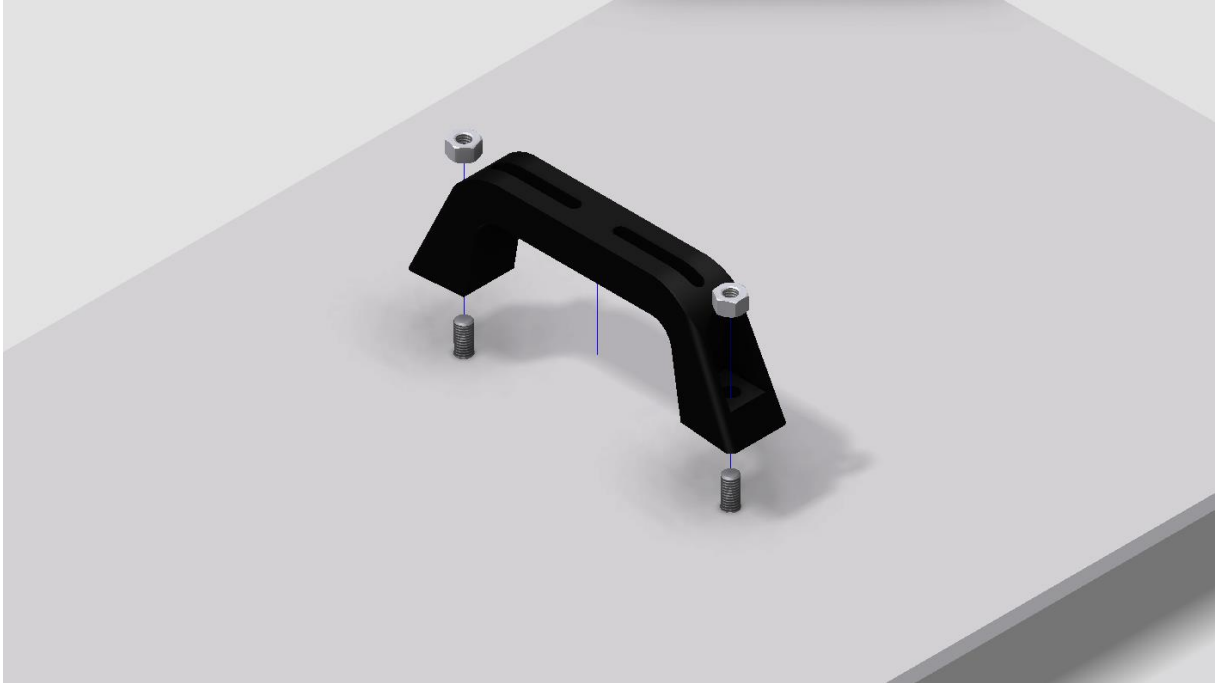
The exploded view of the top plate, showing the assembly of the top plate.
